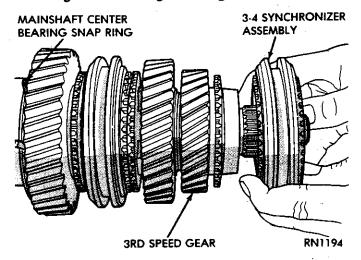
Removing/Installing Gear Set Retaining Snap Ring
